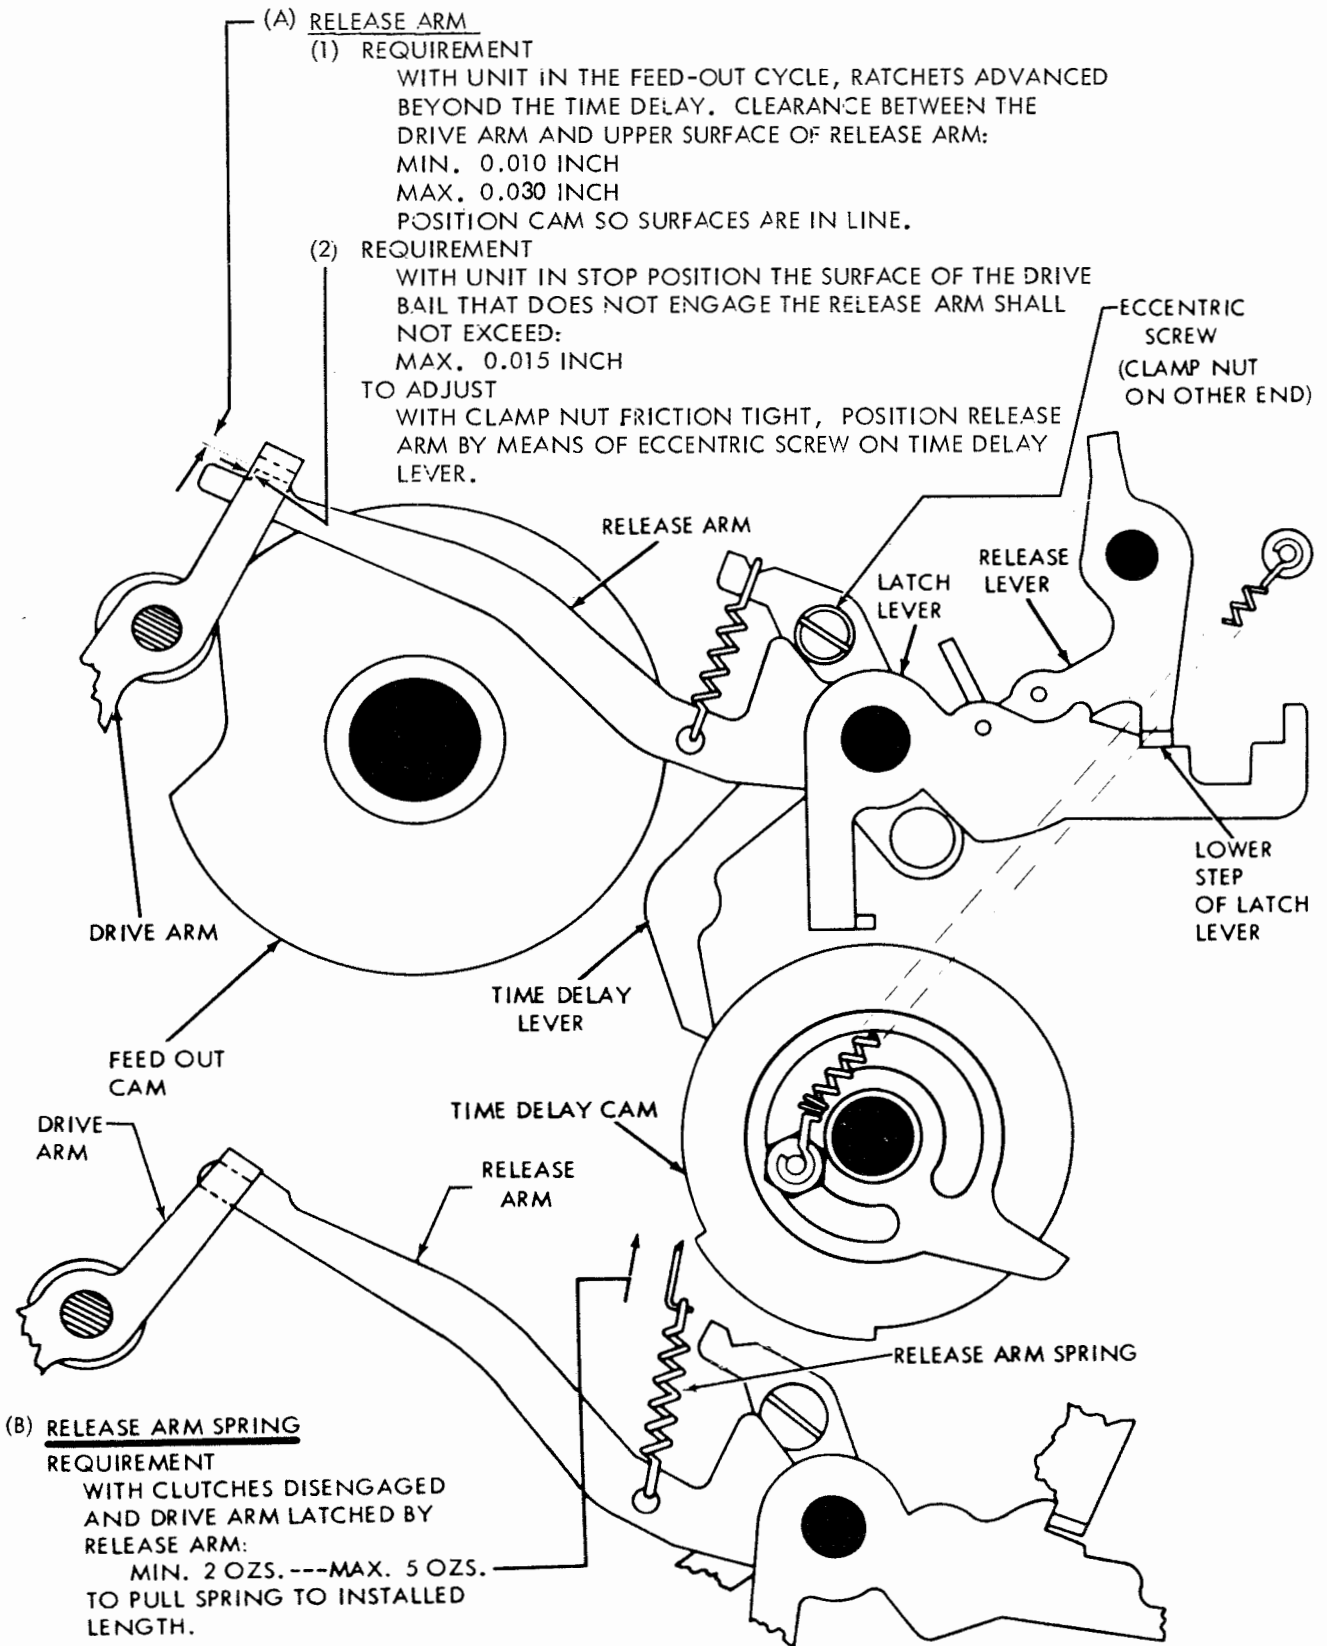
F. TYPING REPERFORATOR TT-375/UG, REMOTE CONTROL NON-INTERFERING BLANK TAPE FEED-OUT MECHANISM
